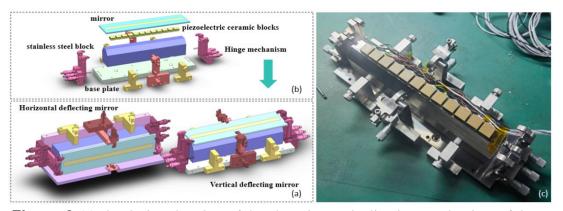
(a)The design drawing of the clamping and adjusting mechanism of the K-B mirror; (b) the 3D exploded view of the vertical deflecting mirror and (c) the photography of the piezoelectric actuators stick on a thick stainless steel block.
